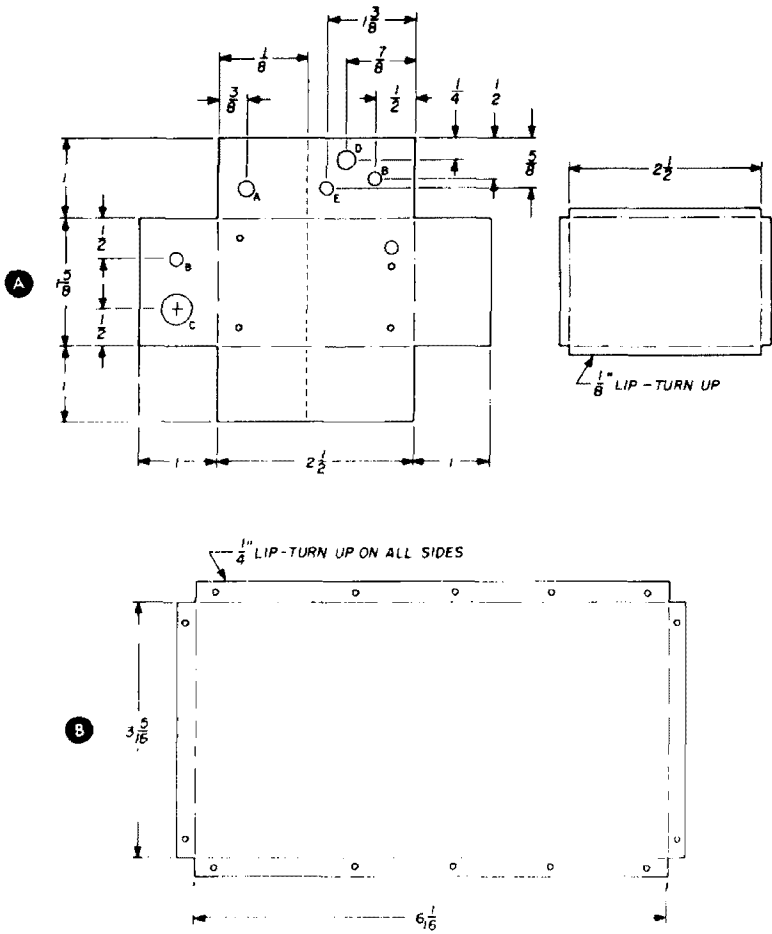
Dimensions for preamp chassis, A, and the main chassis bottom plate.
